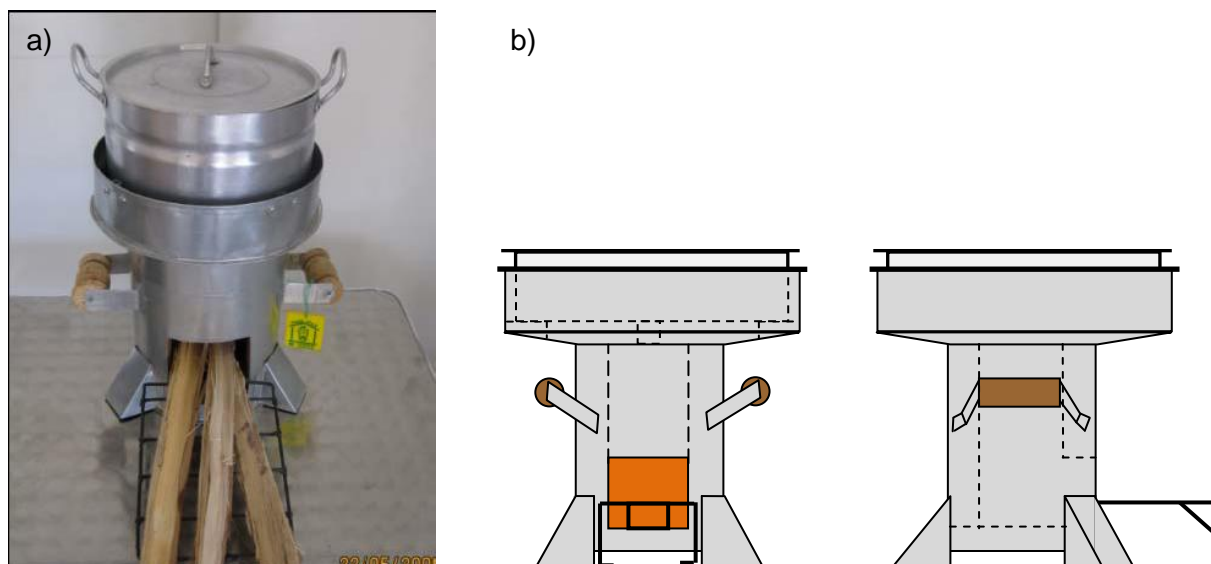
Photograph (a) and technical drawing (b) of Tikikil portable household cook stove.⁸
